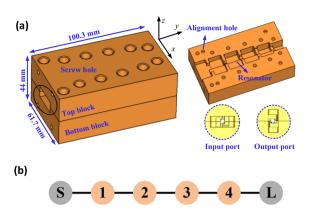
(a) Prototype construction of the fourth-order filtering twist. The left image depicts the assembled prototype and the right images show the machined half blocks and a close-up view of the input and output ports. (b) Coupling topology of the proposed filtering twist
